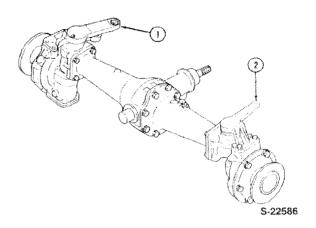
Front Wheel Drive Axle - 1320/1520 Shown
